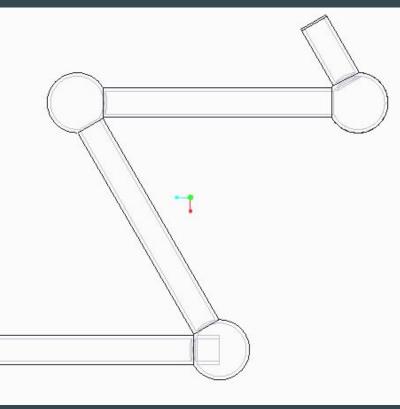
CAD concept drawings of bulb mixing mechanism.
